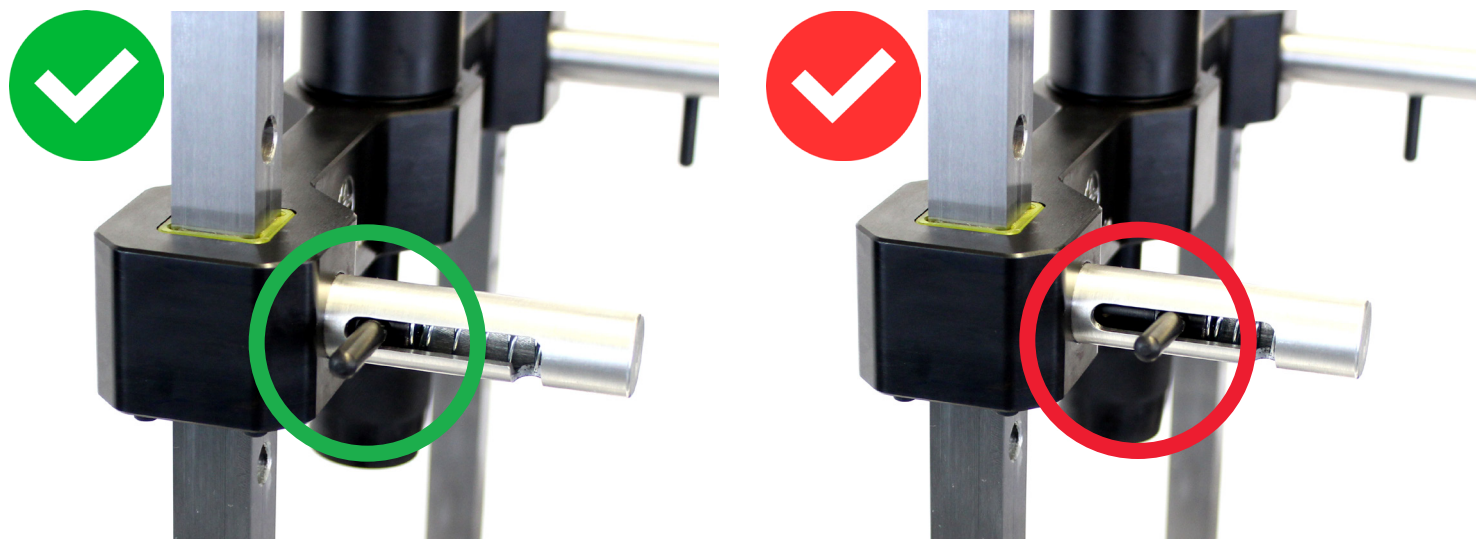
Quick-Change Latch: a) Correct: Fully Engaged, b) Incorrect: Partially Engaged
